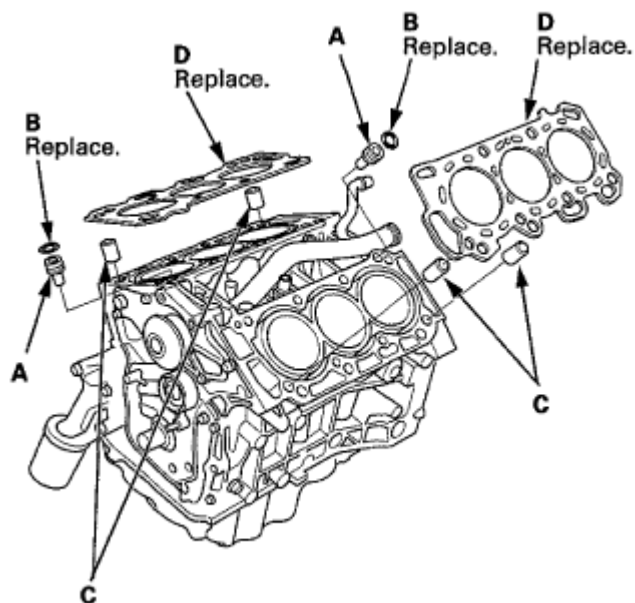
Identifying Oil Control Orifices, Dowel Pins, Gaskets And O-Rings
